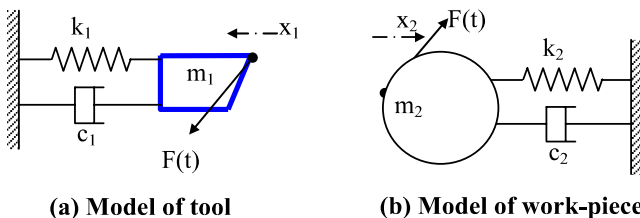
Flexible workpiece model; (a) model of cutting tool and (b) model of workpiece
